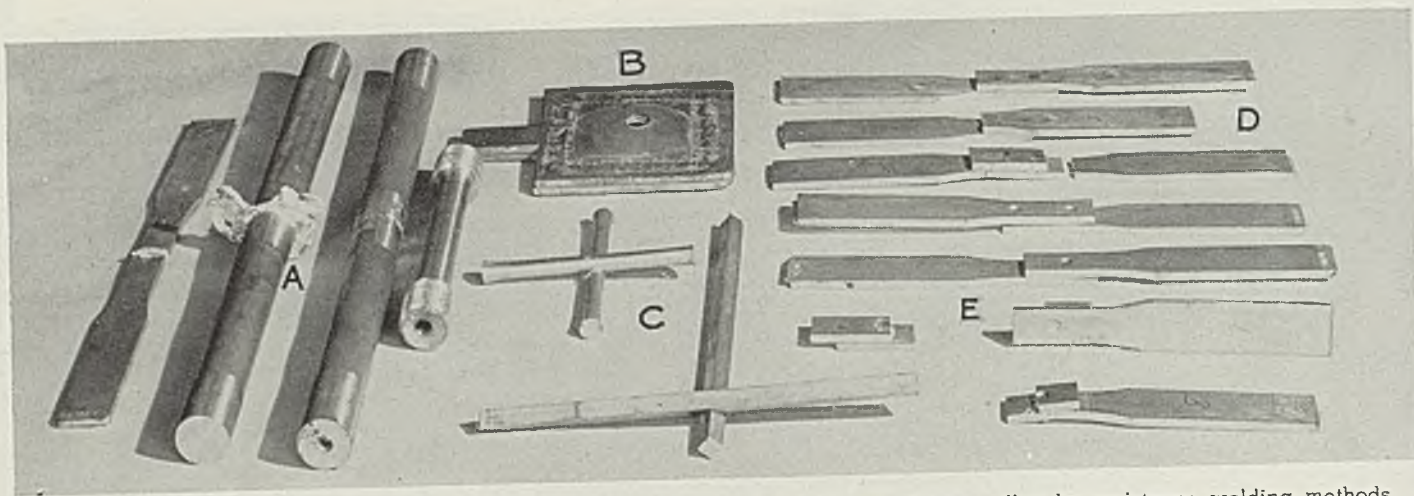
Different types of welds made in zinc alloy by resistance welding methods
